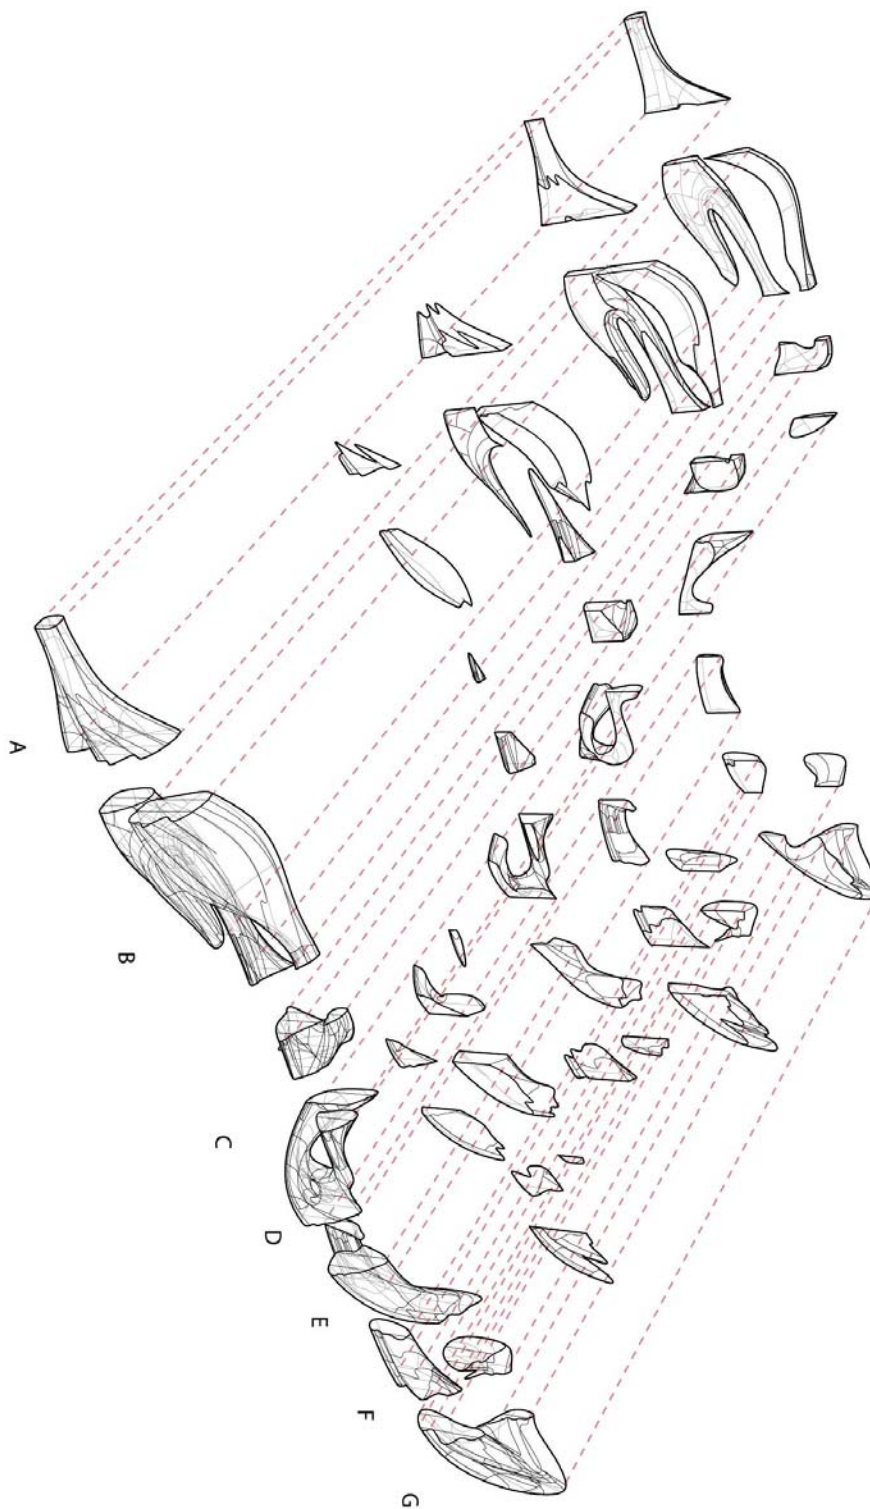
Exploded axonometric of branch structure configuration. Shows sectioning technique of splitting branch into 7 sections horizontally (A-G) and then slicing those sections into 4 inch high pieces.
